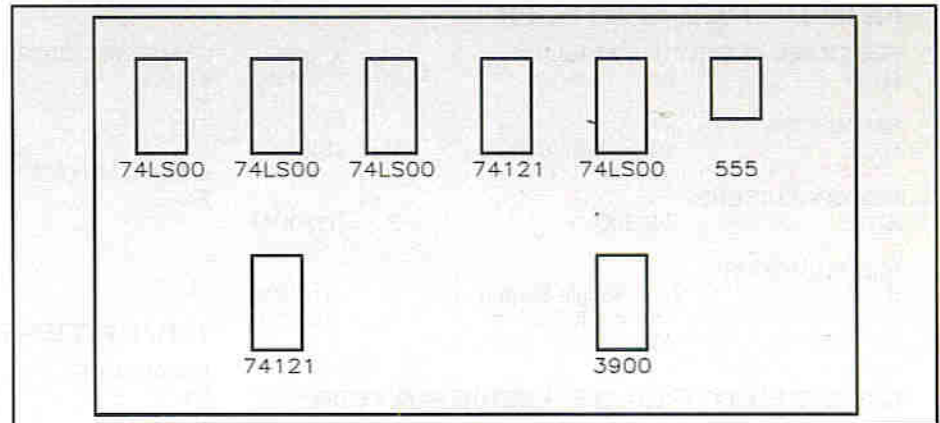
Suggested layout of stripboard for complete TTL Tester Unit.
